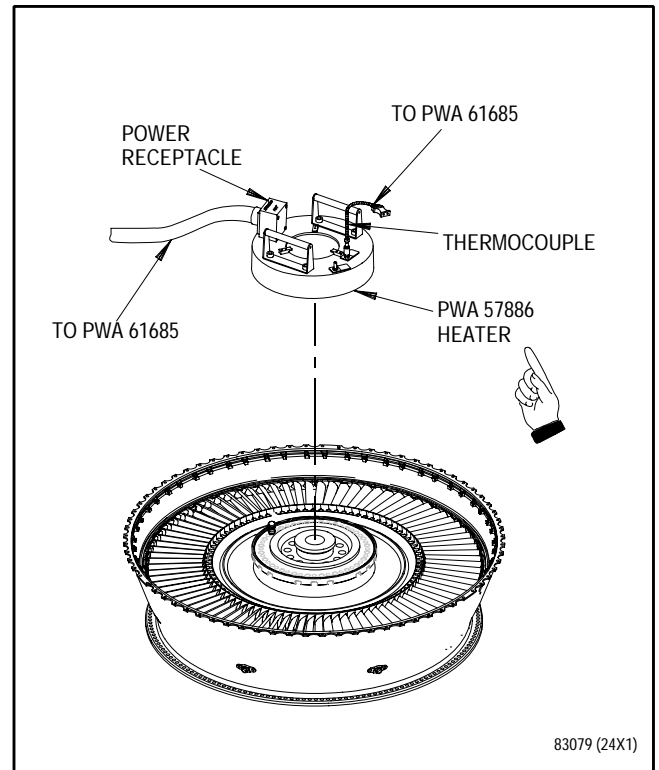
Fourth Stage Turbine Disk, Blades and Air Seal - Installation (Sheet 4 of 7)
